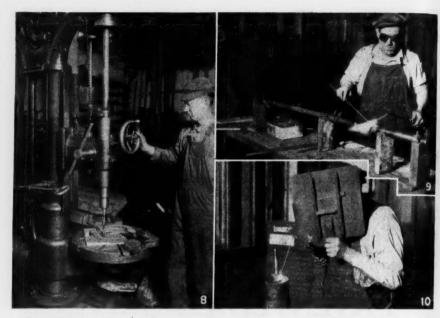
All the heavier drilling is done on this machine. Fig. 9—Welding a new section onto a broken crankshaft. Fig. 10—Using the arc welder to anchor a loose journal in place.
